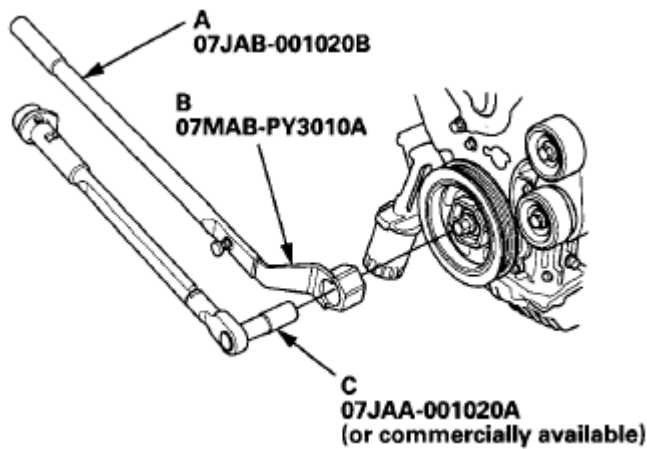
Identifying Holder Handle, Holder Attachment And Offset Of Pulley
